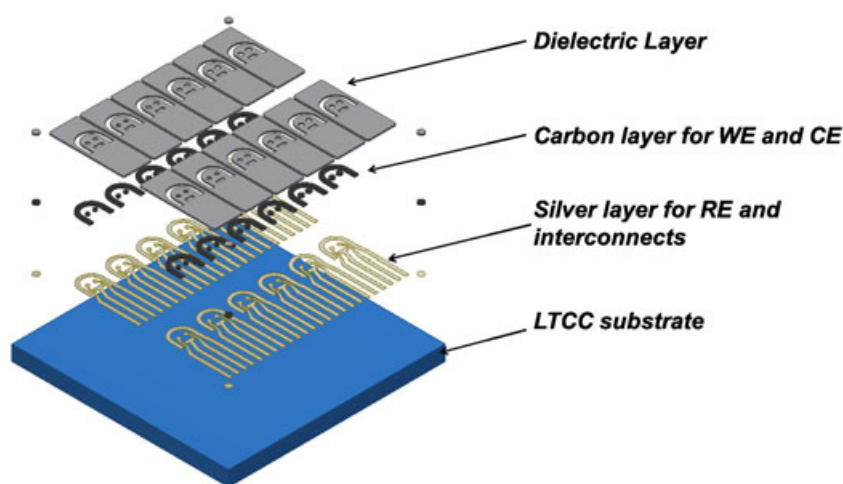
Exploded view of the screen-printed carbon electrode structure.
